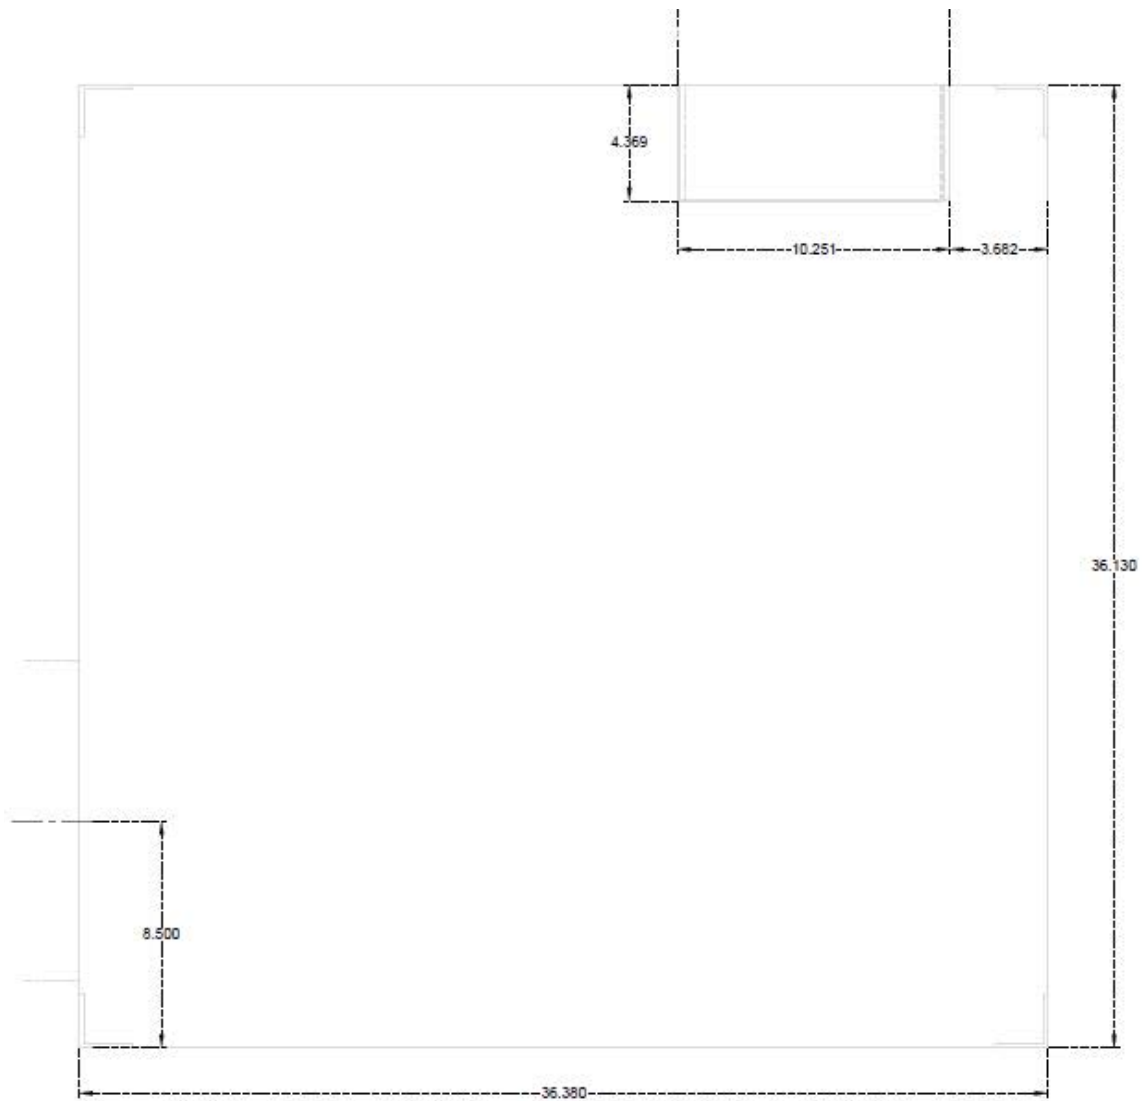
As-built dimensions of inlet plenum (side view; in inches).
